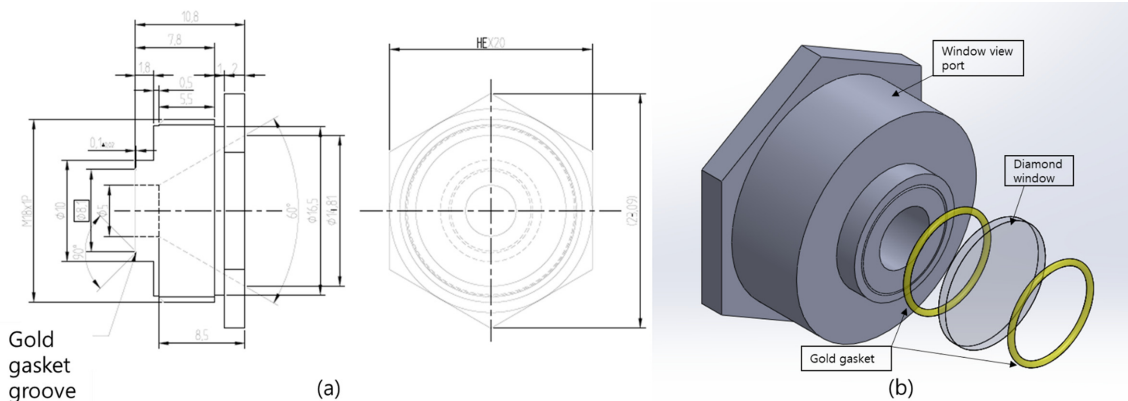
Drawing of (a) window viewport design and (b) assembly diagram
